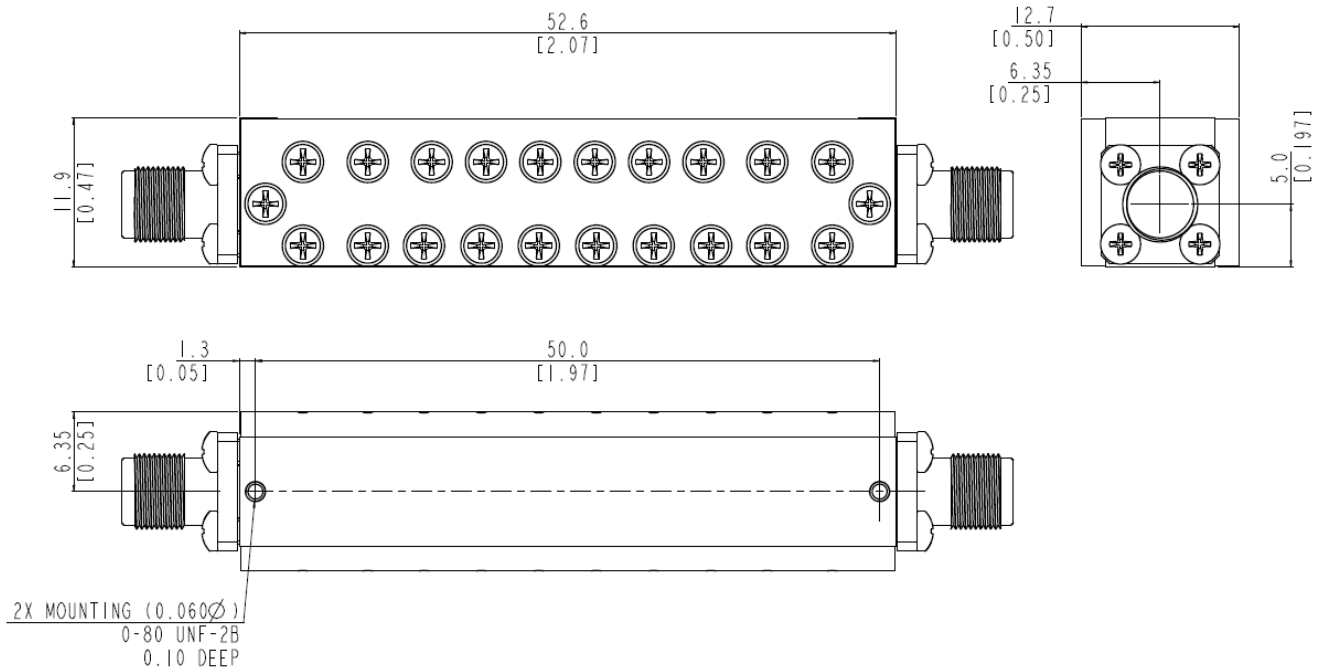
JX-CF1-9.9G10.8G-S6 front panel layout
